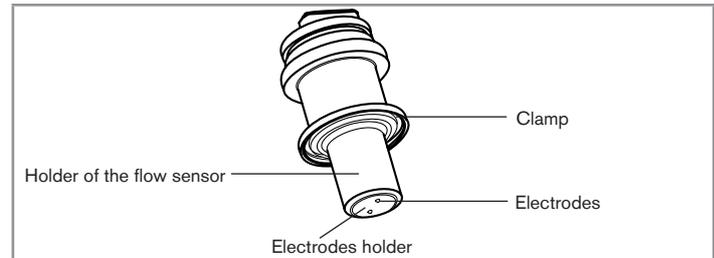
Parts of the flow sensor in stainless steel with a clamp connection
